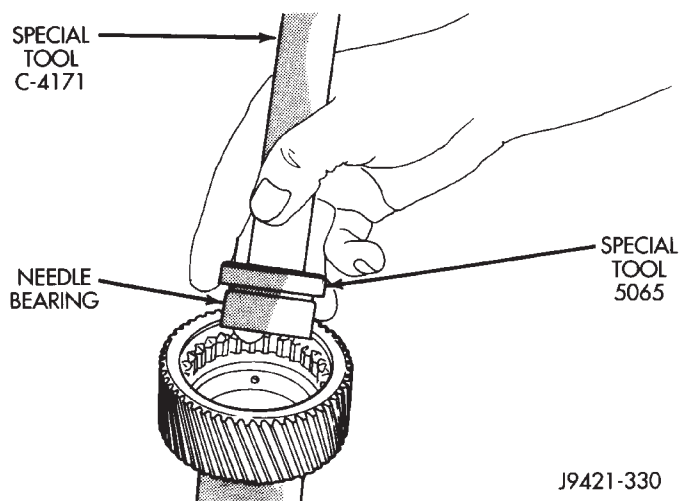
Installing Mainshaft Pilot Bearing In Input Gear
